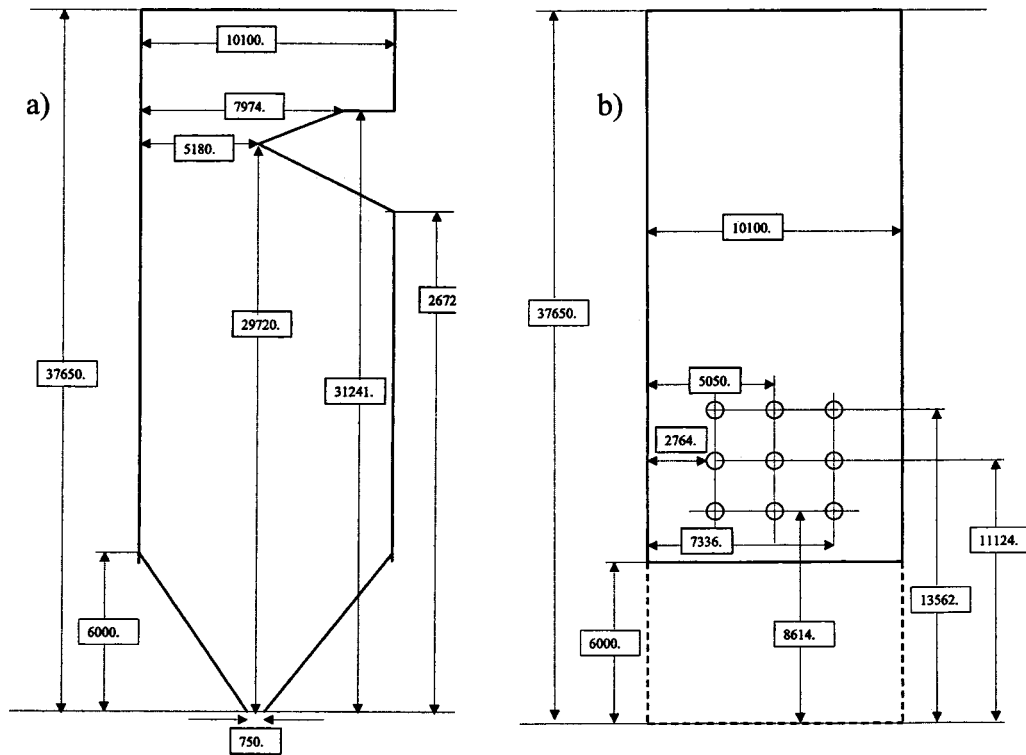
Dimensions (mm) of the combustion chamber; (a) lateral view; (b) front view
